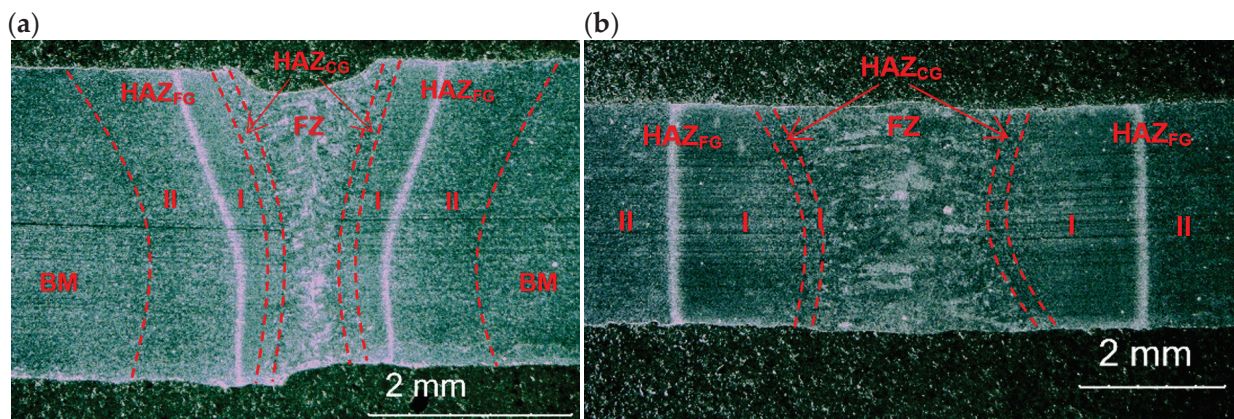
Cross-sections of the 3.0 mm thick butt joints of ArmoX 500T steel produced via autogenous laser welding (Table 4); (a) at lowest energy input of 70 J/mm (3.0 kW, 2.5 m/min), (b) at highest energy input of 180 J/mm (1.5 kW, 0.5 m/min); BM: Base Metal, FZ: Fusion Zone, HAZ_{FG}: Fine-Grained Heat-Affected Zone, HAZ_{CG}: Coarse-Grained Heat-Affected Zone.
